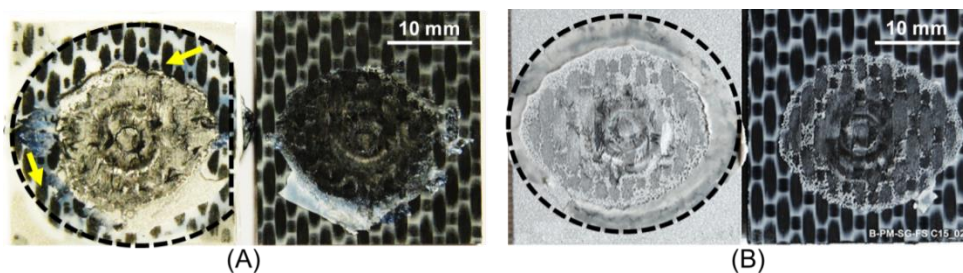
Representative example of fracture surfaces of FSp joints (A) with interlayer and (B) without interlayer [40]. (Condition H, Table 4.4)
